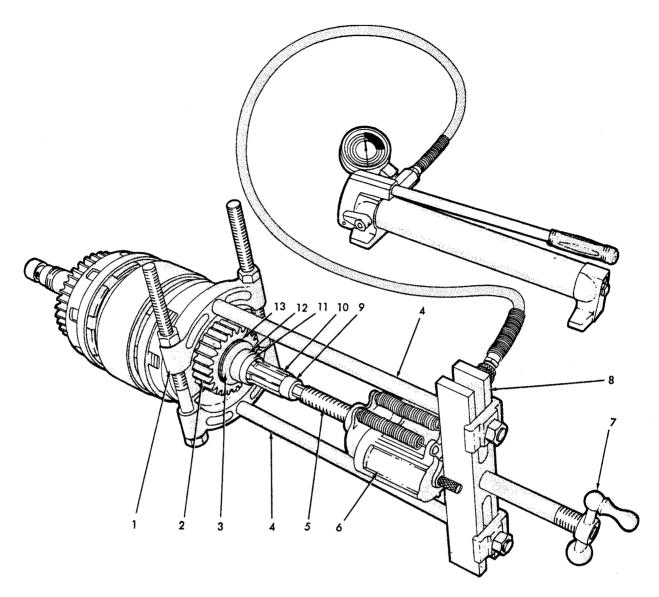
Removing Rear Clutch Drum and Gear (T-72340)
